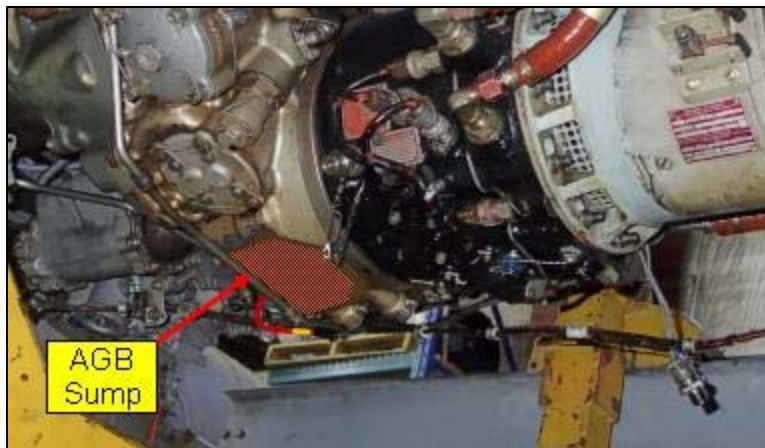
Engine AGB Hydraulic element: TEP2878- left side lead left.
